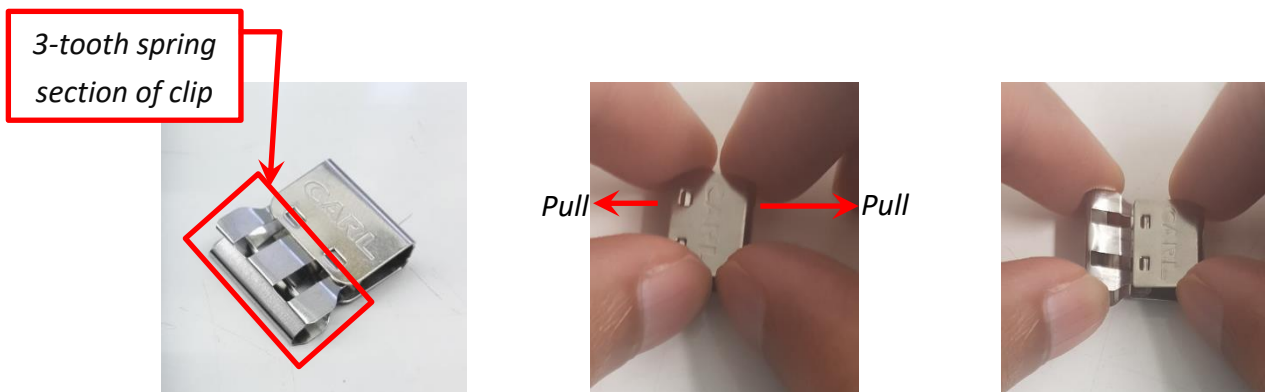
Image of the quick release push-pull spring clip and how to extend 3-tooth spring section of clip before use on sample holder
